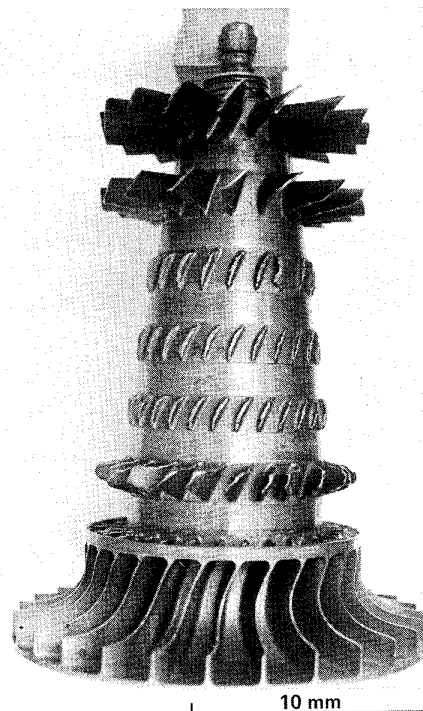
Compressor rotor of helicopter engine after service failure caused by pitting corrosion (see figure 1c): rotor material 17 - 4 PH steel
